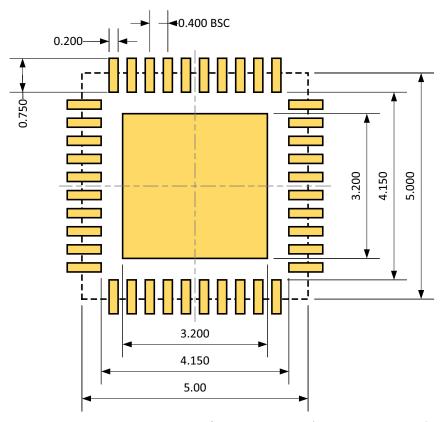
Recommended Board Layout for QFN40 package (All Dimensions in mm)
